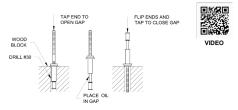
LUBRICATING CHERRYMAX RIVETS
